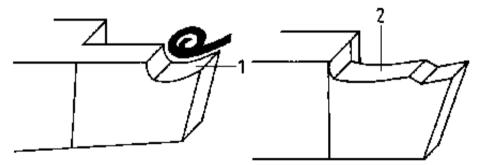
Round (concave) corner for the chips to roll off at the end-cut turning tool
